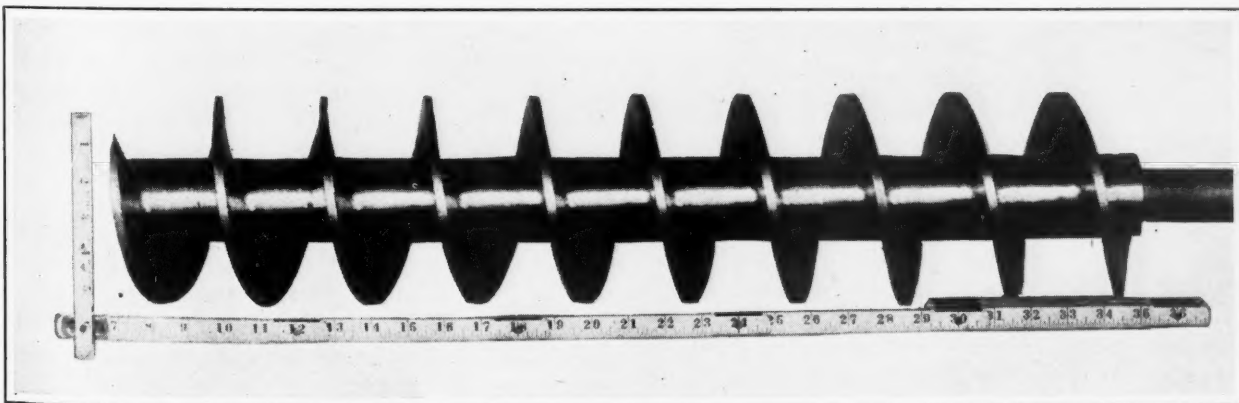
Screw Shown in Fig. 1 after being Machined on the Lathe
